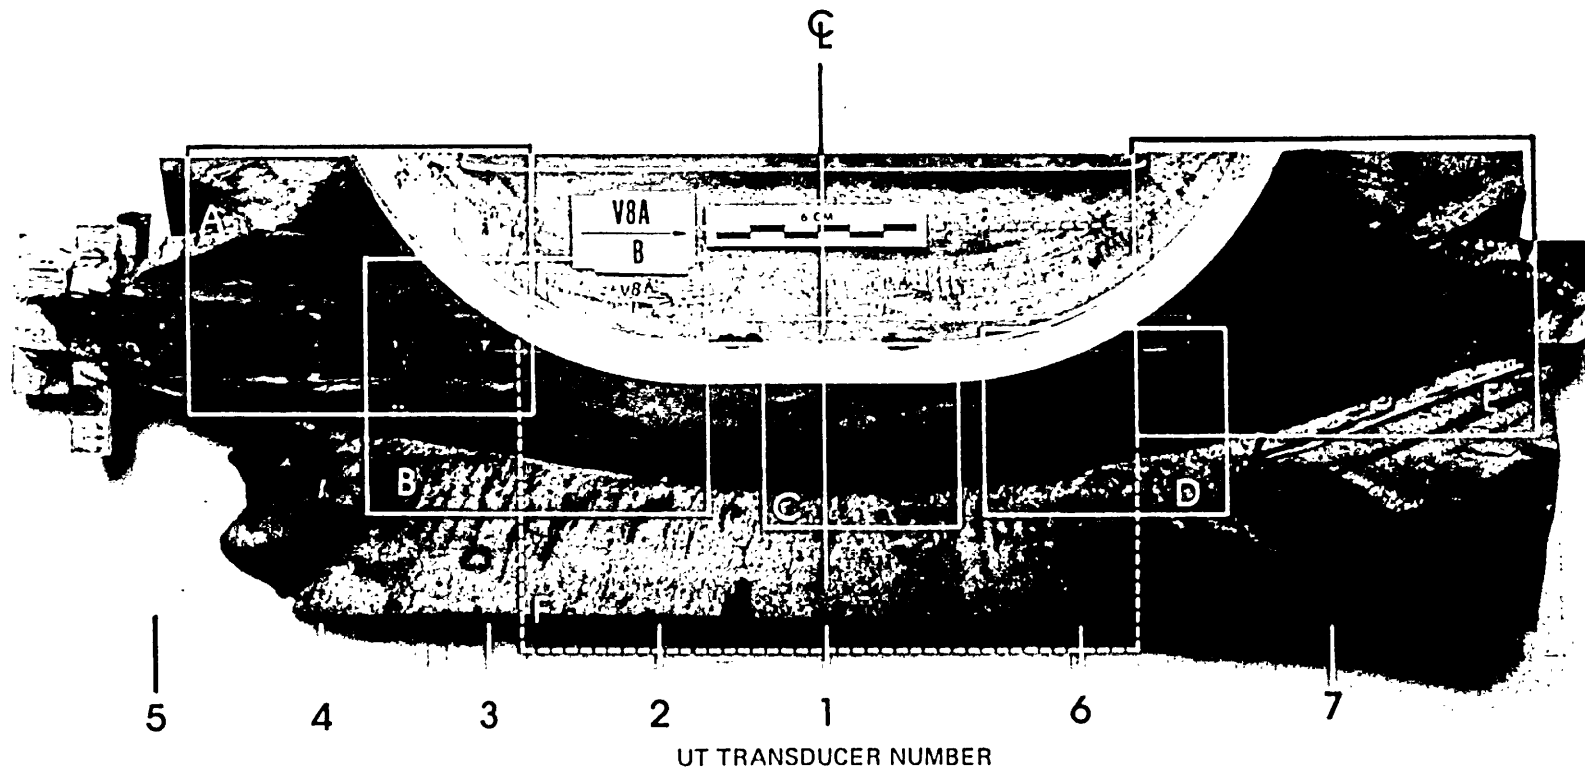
Photograph of fracture surface B identifying areas shown in subsequent figures.
